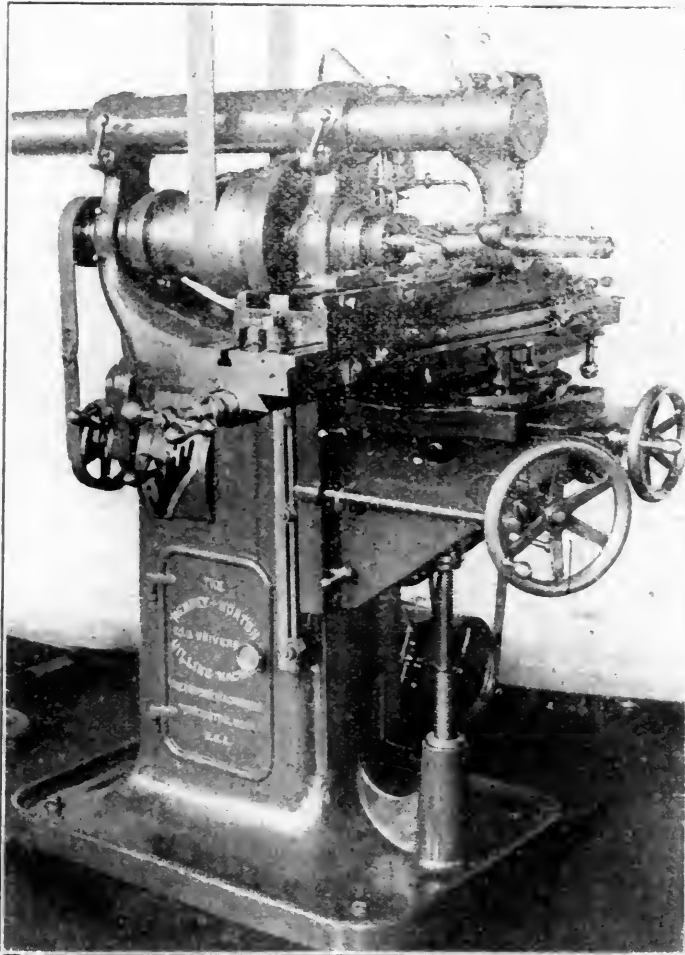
VIEW OF THE HENDEY-NORTON MILLING MACHINE, SHOWING CONVENIENT ARRANGEMENT OF THE SPEED-BOX IN THE FRAME AT THE LEFT.
